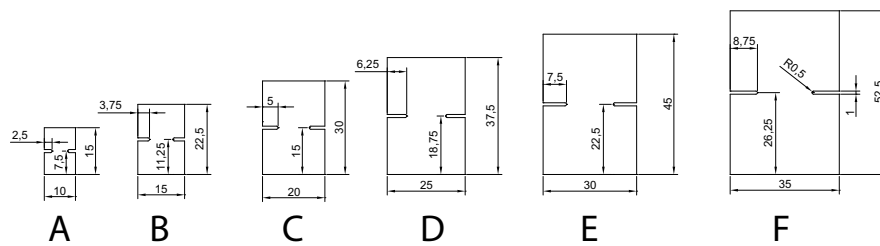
Compression specimen geometries showing dimensions from A to F in mm [19].
